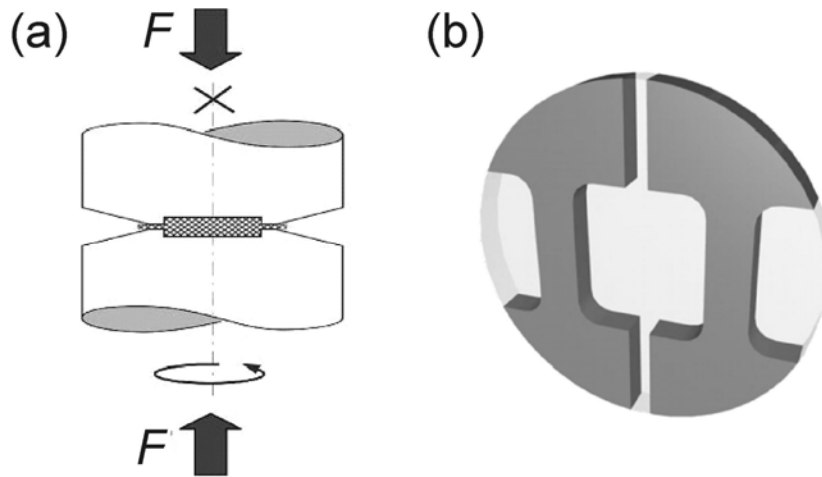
(a) Working principle of high pressure torsion (HPT) with the sample between the upper and the lower anvil. After deformation and heat treatment tension specimens with a gauge length of 8 millimeter were machined as depicted in (b). See text for details.
